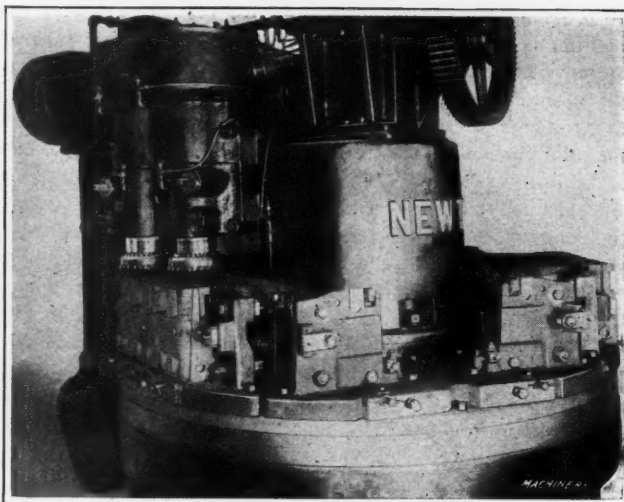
Jigs used for Final Milling Operations on Cylinder Blocks
